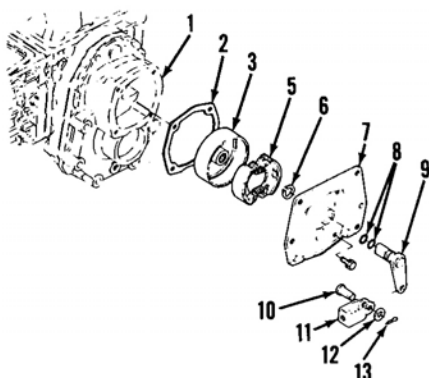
A—Exploded view of brake assembly used on Models B5100D and B5100E. Refer to legend in Fig. 87 for identification of parts.
